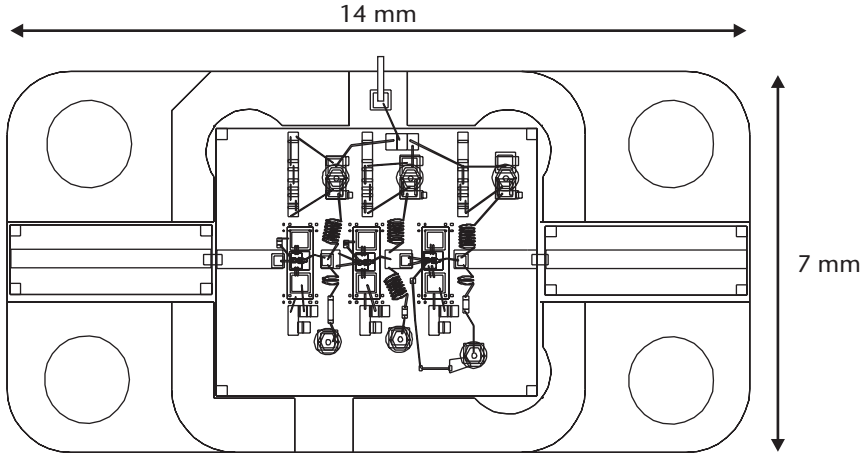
Assembly drawing of the three-stage high-gain CRTSSDA module.
